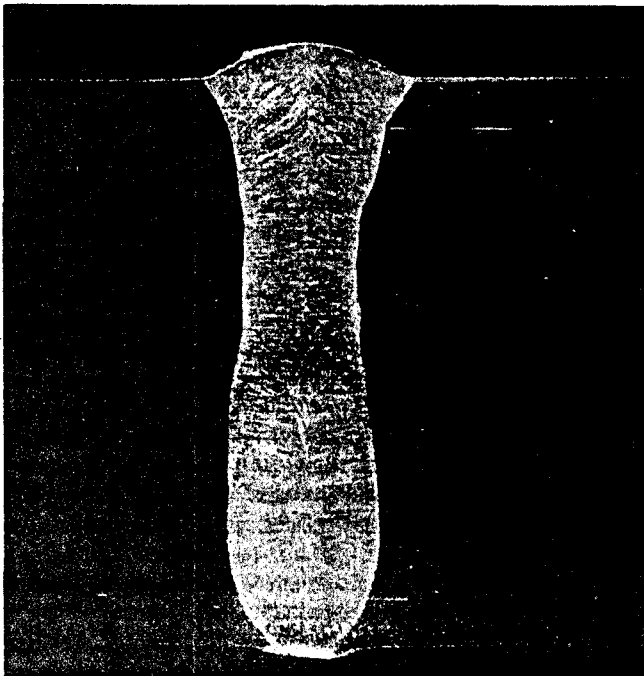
A Cross Section of a Nonvacuum Electron Beam Weld in 3/4 in. (19 mm) Stainless Steel Plate Made in Air With 12 kW of Power
